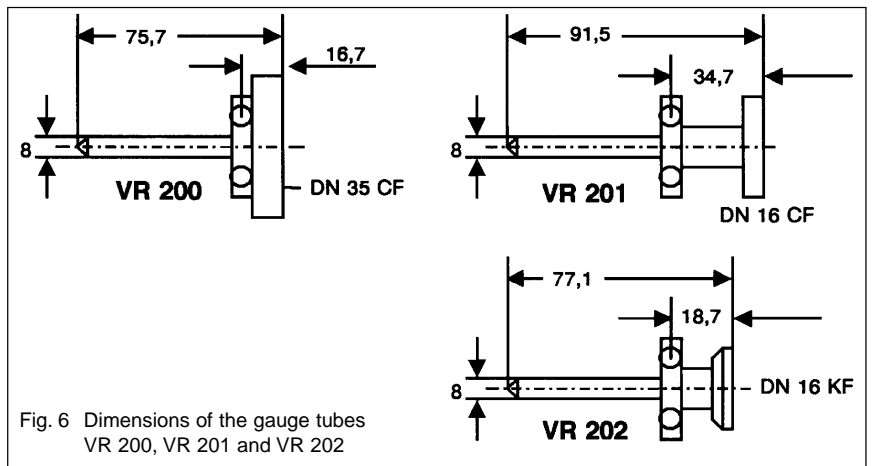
Dimensions of the gauge tubes VR 200, VR 201 and VR 202
